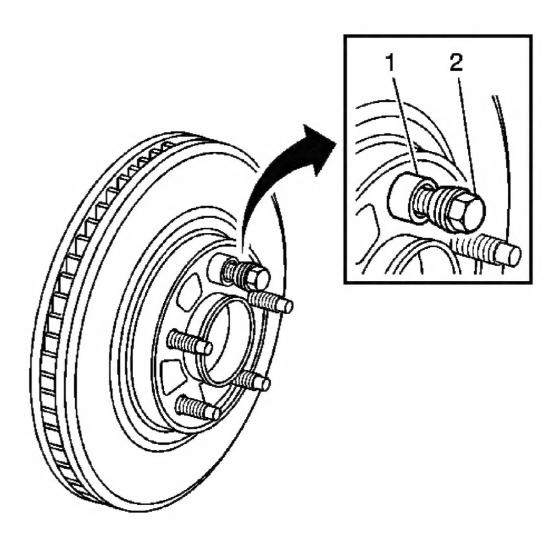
Identifying J 45101-100 & Lug Nut Courtesy of GENERAL MOTORS CORP.
